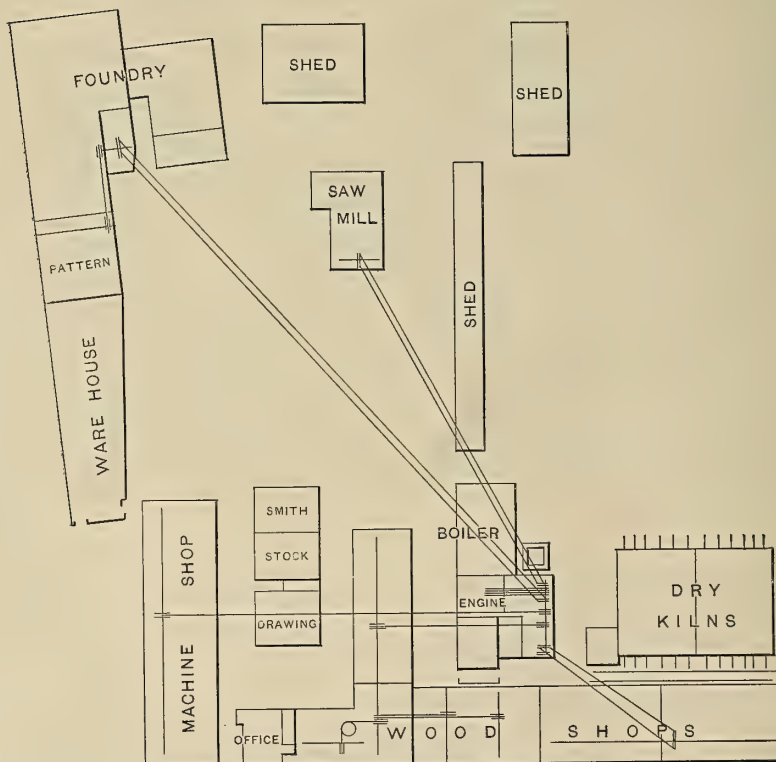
PLAN OF A TYPICAL ROPE-DRIVEN ESTABLISHMENT.
